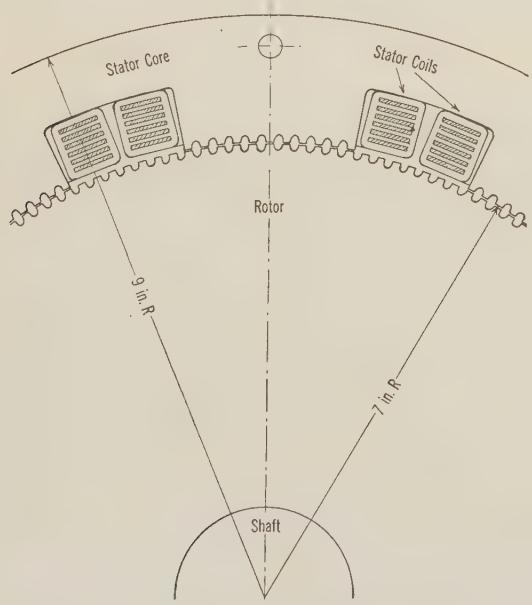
SECTIONAL VIEW OF ALTERNATOR
